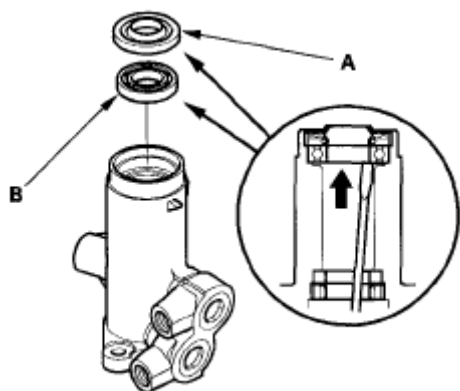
Identifying Valve Oil Seal And Roller Bearing From Valve Housing
